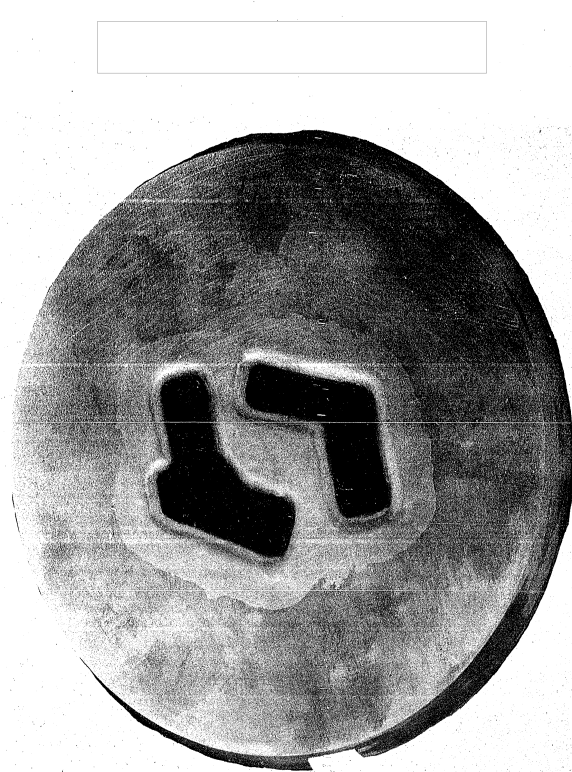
PHOTOGRAPH OF A MULTI-OPENING EXTRUSION FOR P/N 227594 AND P/N 227596
